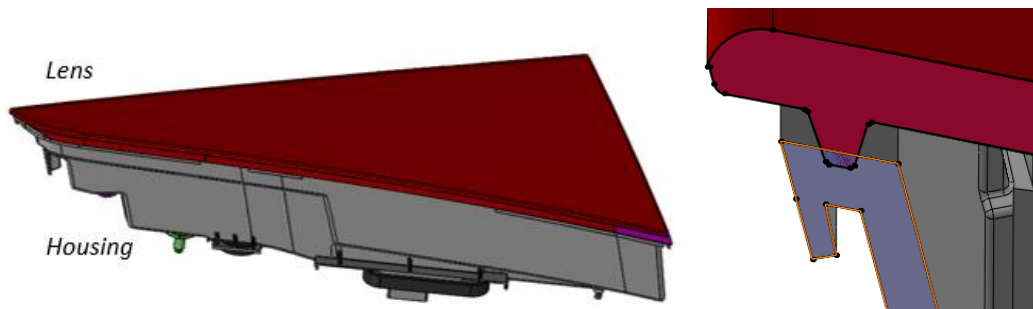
Taillight of an automotive: a) Main components for welding; b) Section of the welding joint
